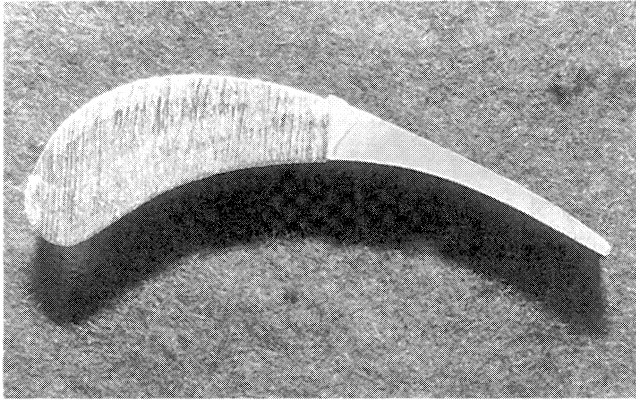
Sectioned View of Blade Shown in Figure 5. (The progression of the fatigue crack can be seen.)
